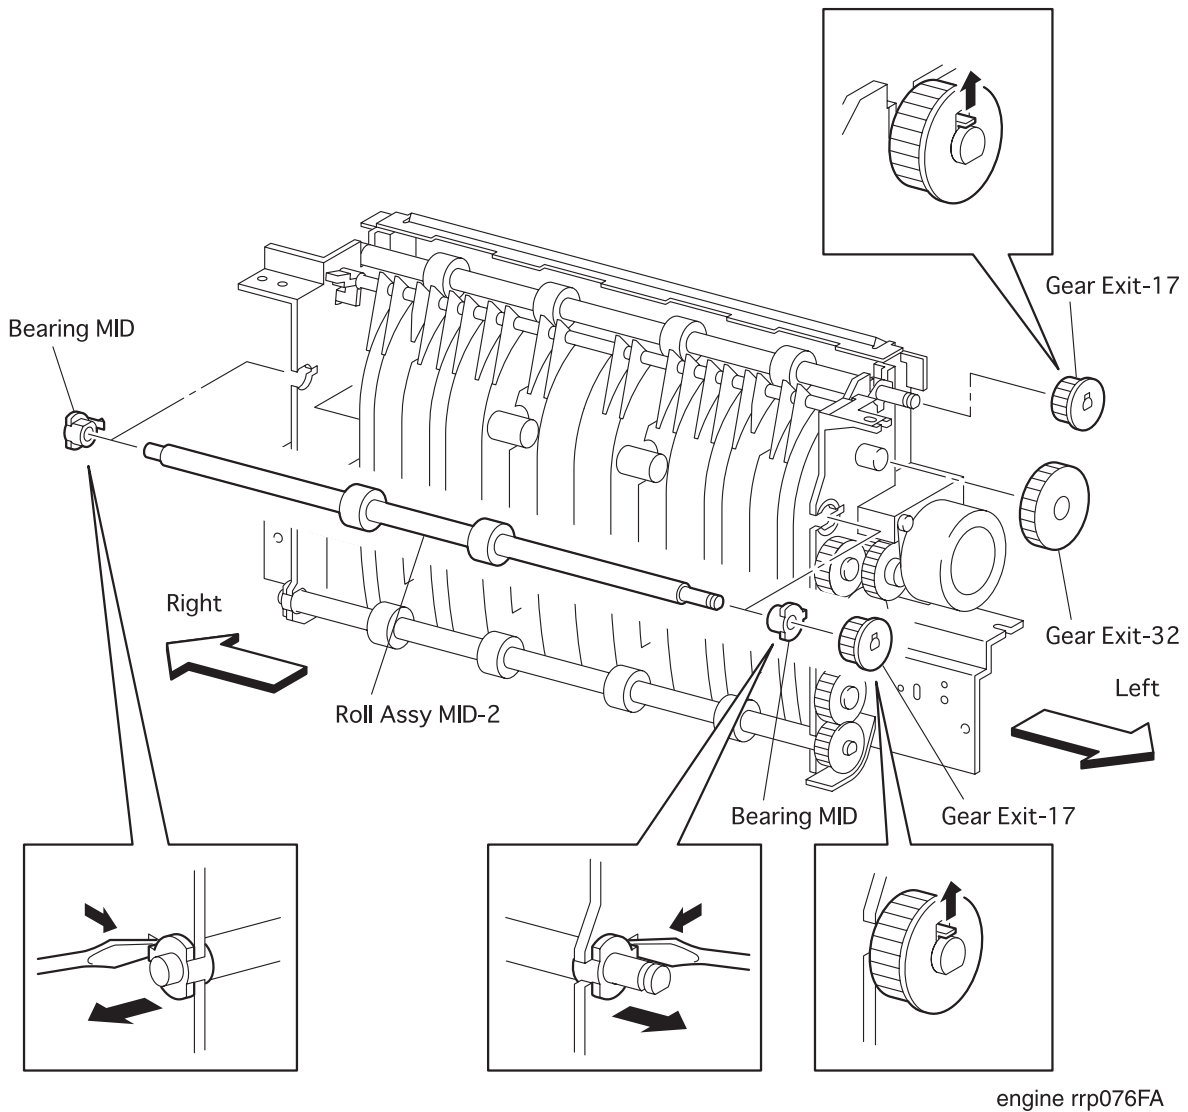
Bearing MID and Roll Assy MID-2 Removal
